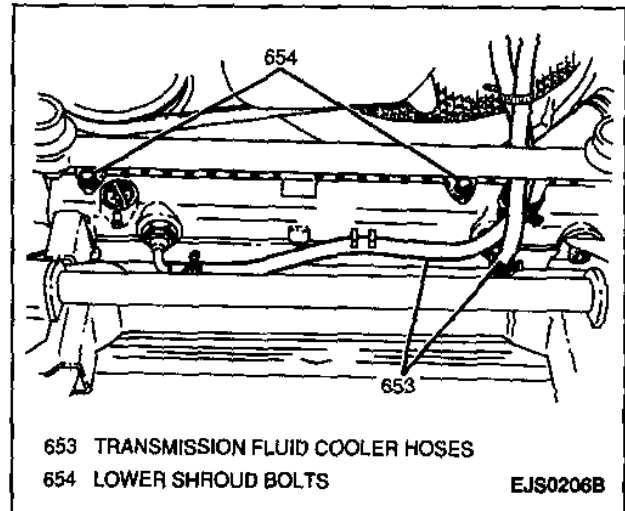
Transmission Fluid Cooler Hoses and Lower Shroud Bolts
